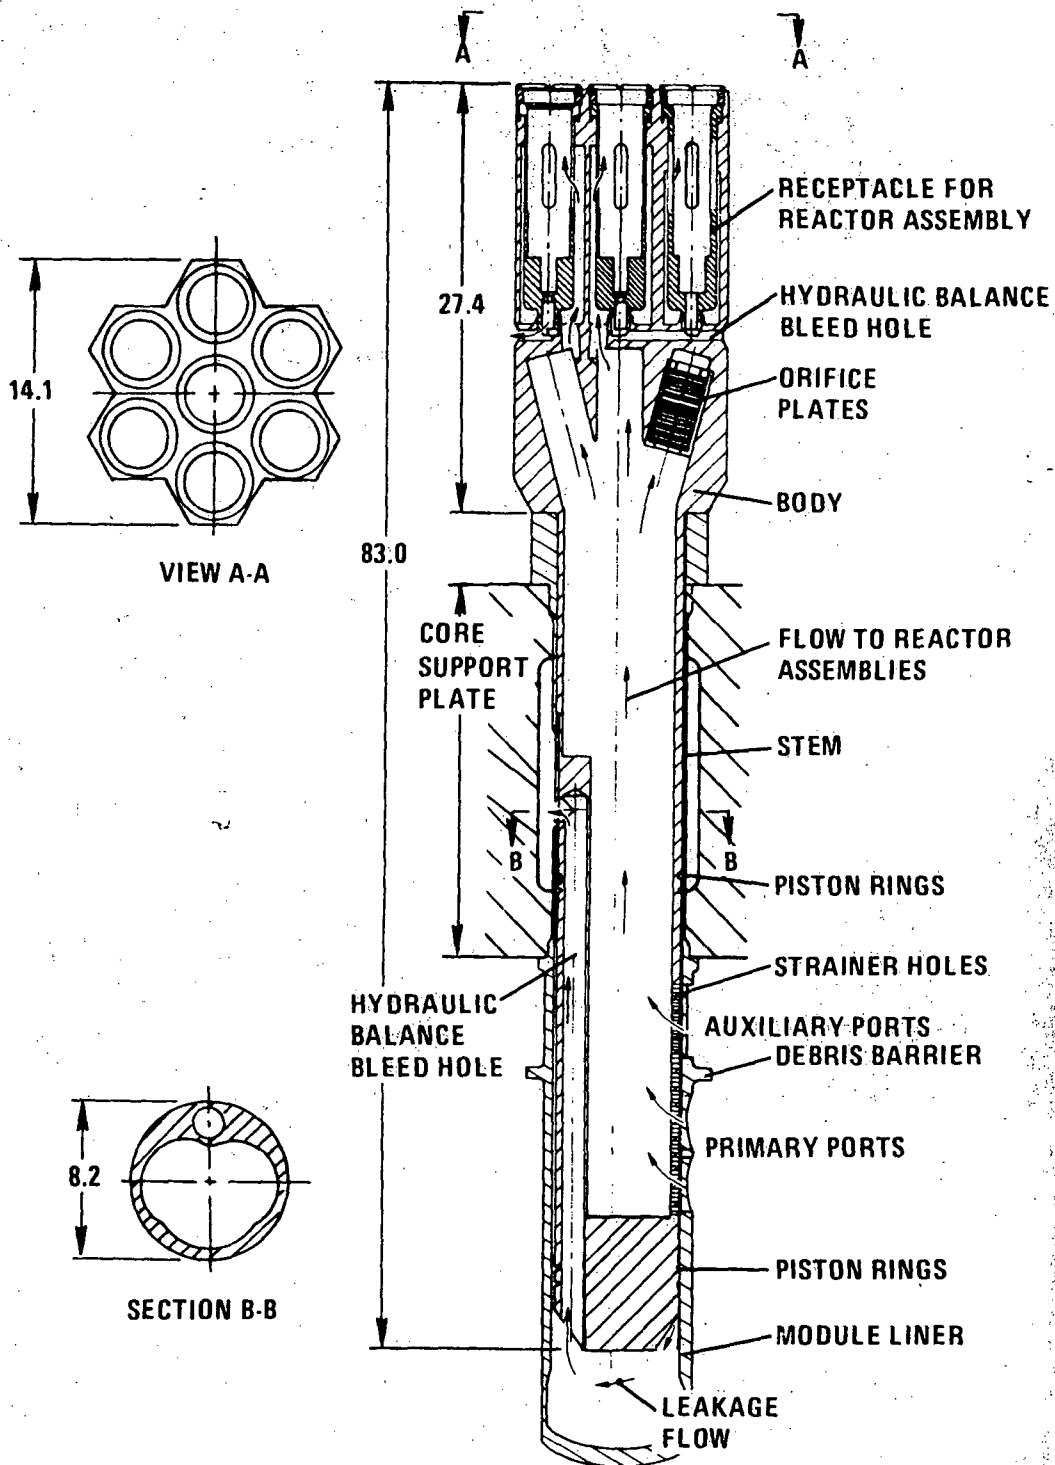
Elevation of Typical Lower Inlet Module
